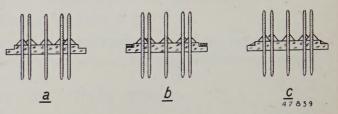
a) Base plate of a radio valve of A series with moulded-in contact pins. Actual size.
